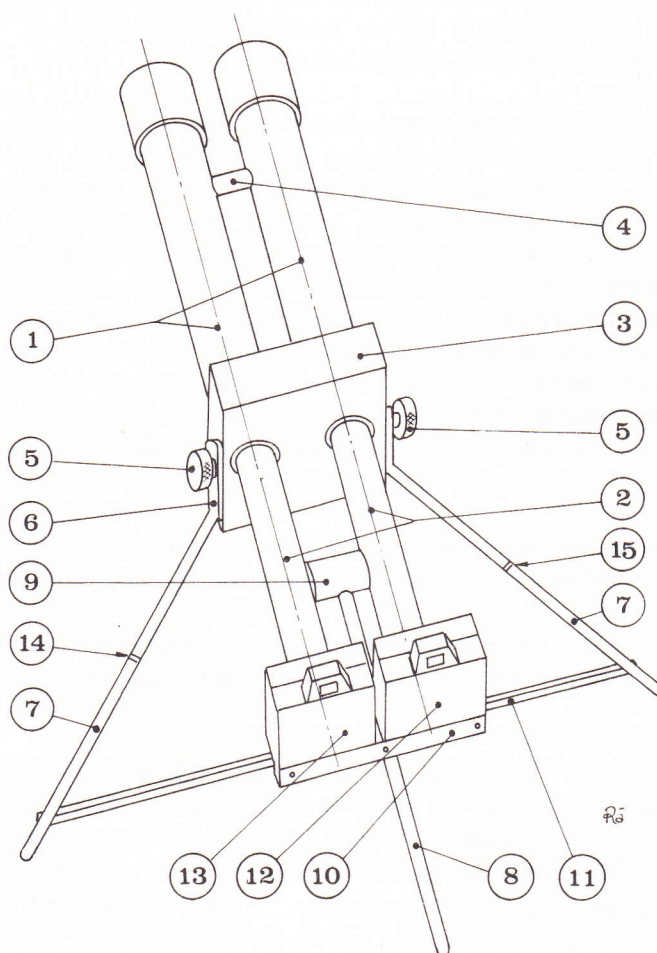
The 2-Barrel System. 1, telescope front end tubes; 2, telescope rear end tubes; 3, wooden frame; 4, spacer; 5, locking screws, knurled; 6, angle bracket; 7, legs; 8, adjustment leg; 9, swivel joint; 10, camera bracket; 12, B&W - SLR camera; 13, colour - SLR camera; 14 & 15, dowel joint.
